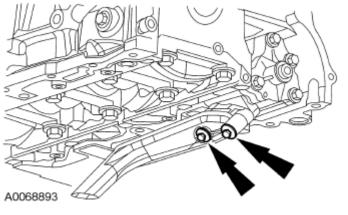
Locating Bolts, Oil Pump Pickup Tube And Gasket Courtesy of FORD MOTOR CO.
